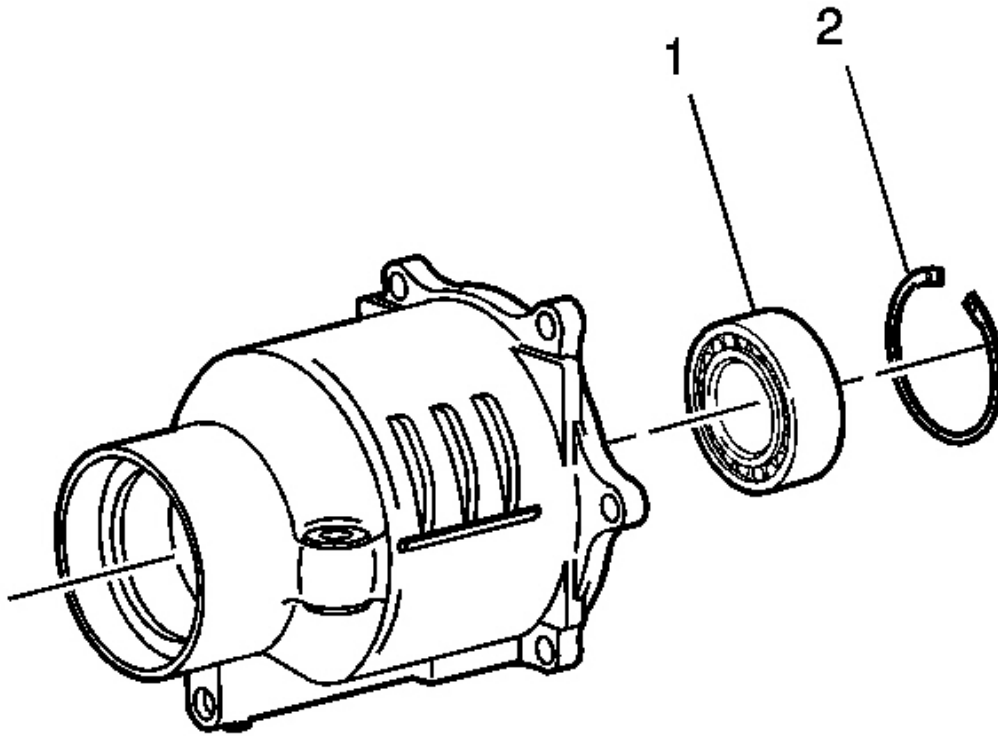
Installing Bearing & Snap Ring On The Clutch Cover
